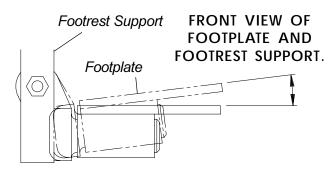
ADJUSTABLE ANGLE FLIP-UP FOOTPLATE PERPENDICULAR AND/OR INVERSION/EVERSION ADJUSTMENT
